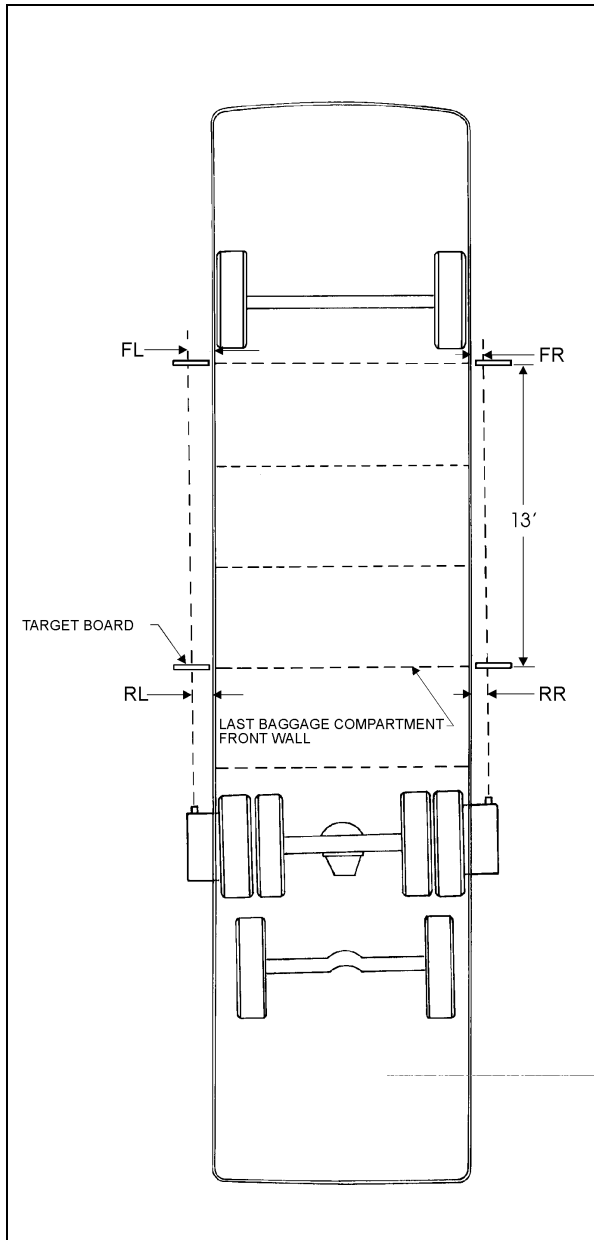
DRIVE AXLE ALIGNMENT 11008
